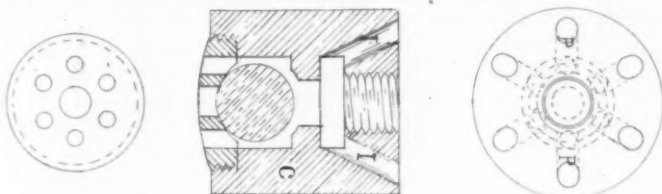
A PLUNGER WITH AUTOMATIC VALVE FOR A DIE-CASTING MACHINE.
